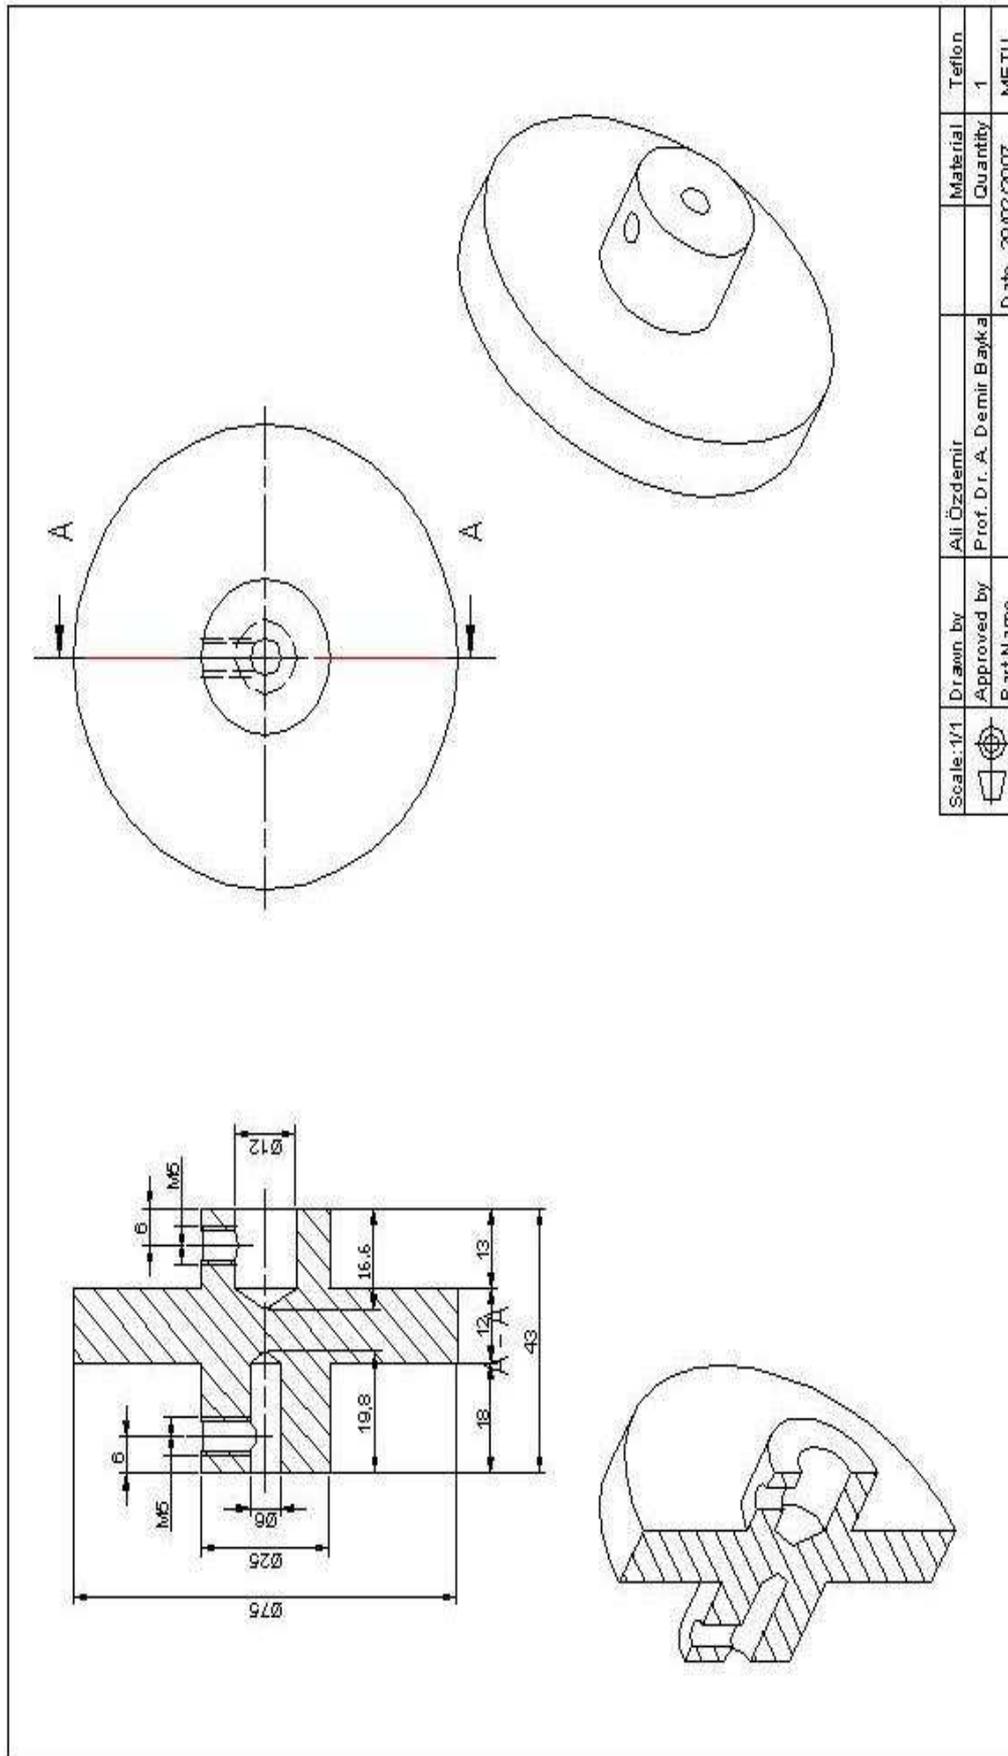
Technical Drawing of the Adaptor of Dilution Tunnel Stepper Motor
